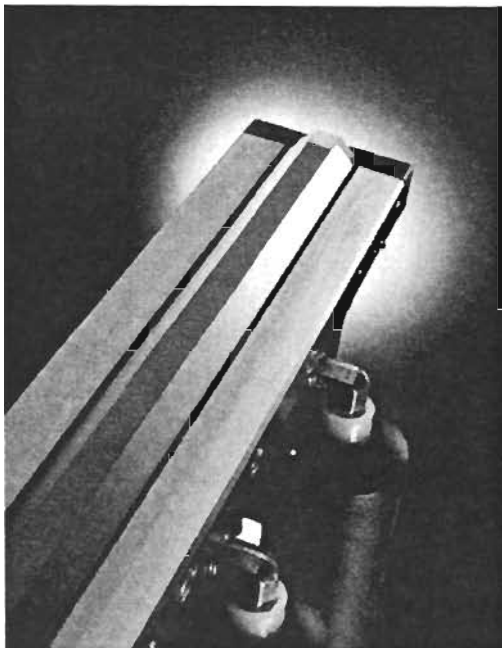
Example of sealed print head, typical of modern print head design. It prevents paste drying out. Spring steel blade design (Speedline MPM)
